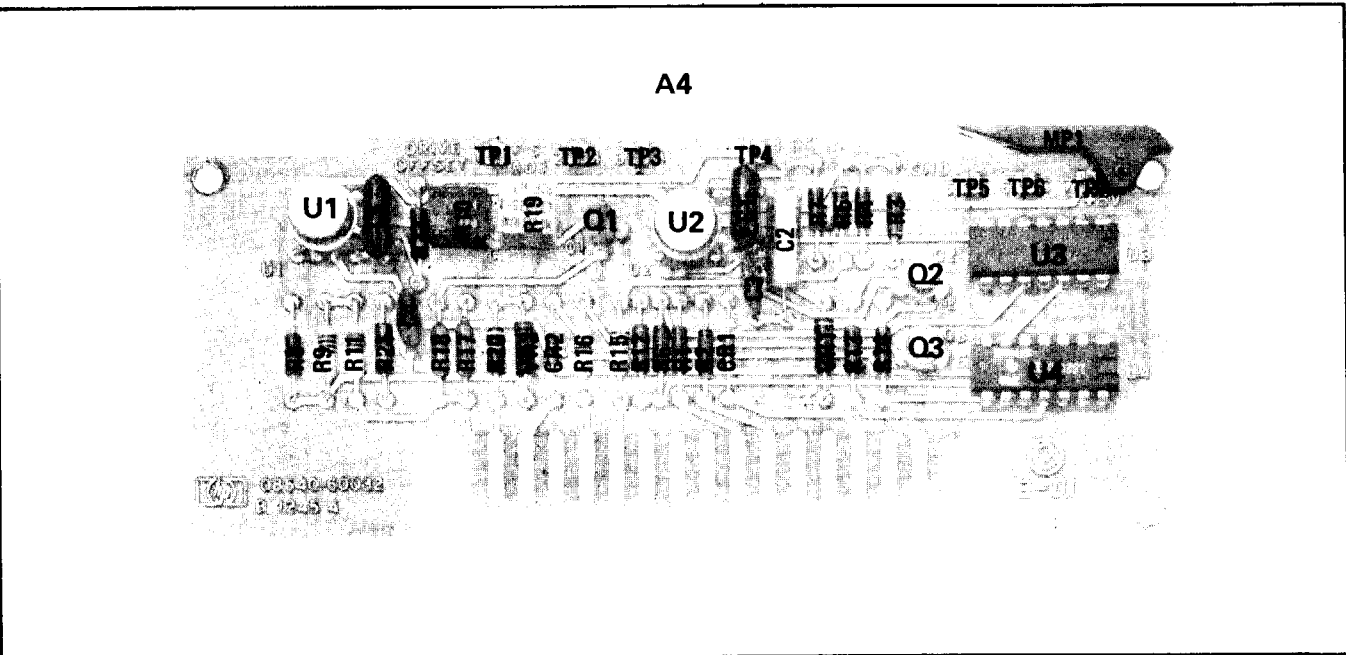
A4 Meter/Annunciator Drive Assembly Component Locations
